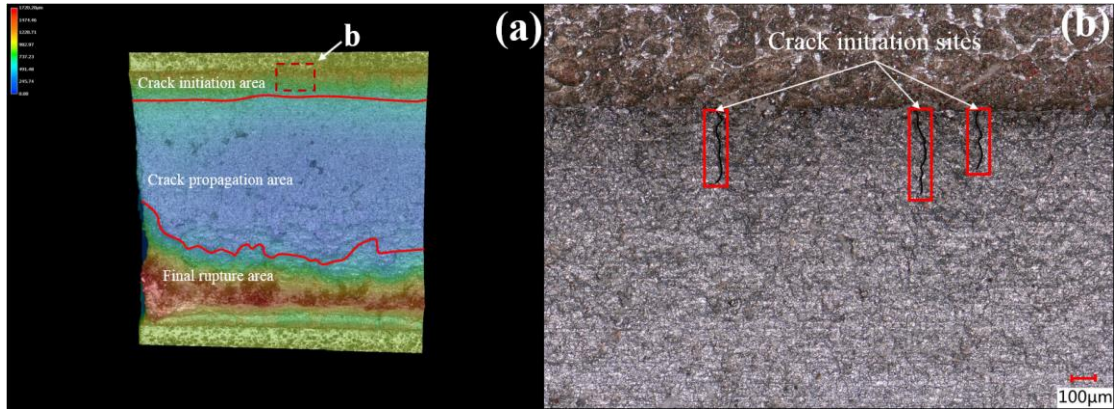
The macroscopic fracture surface topography (a) and the microscopic topography of fatigue crack initiation area (b) in the CA load fatigue test with the load of 235 MPa
